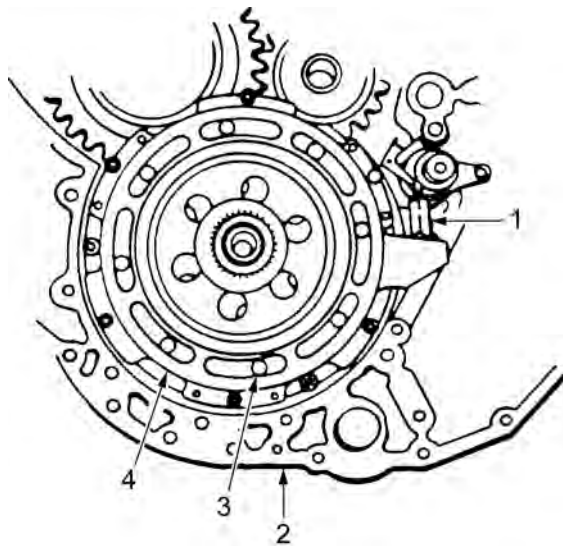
Brake Apply Cam and Brake Adjusting Linkage Removal.
